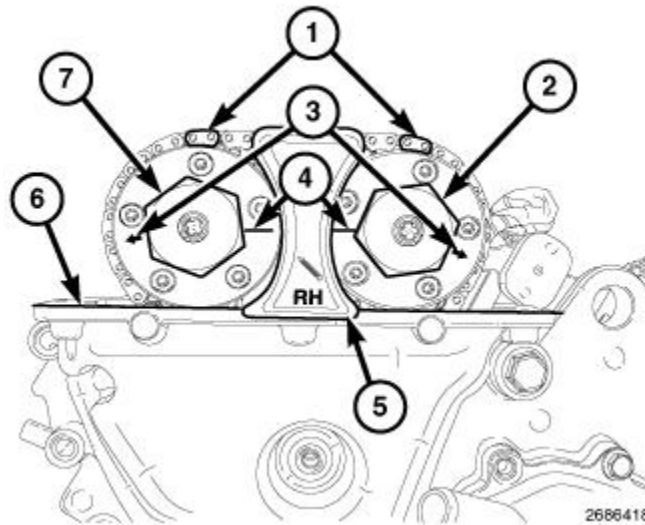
Phaser Timing Marks, Oil Control Valves & RH Camshaft Phaser Lock
